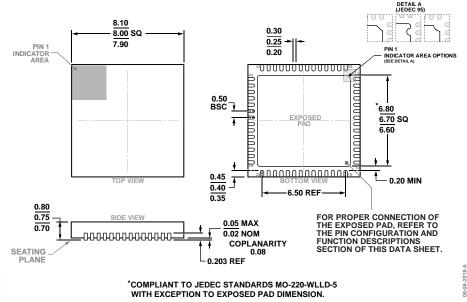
56-Lead Lead Frame Chip Scale Package [LFCSP] 8 mm × 8 mm Body and 0.75 mm Package Height (CP-56-16) Dimensions shown in millimeters
